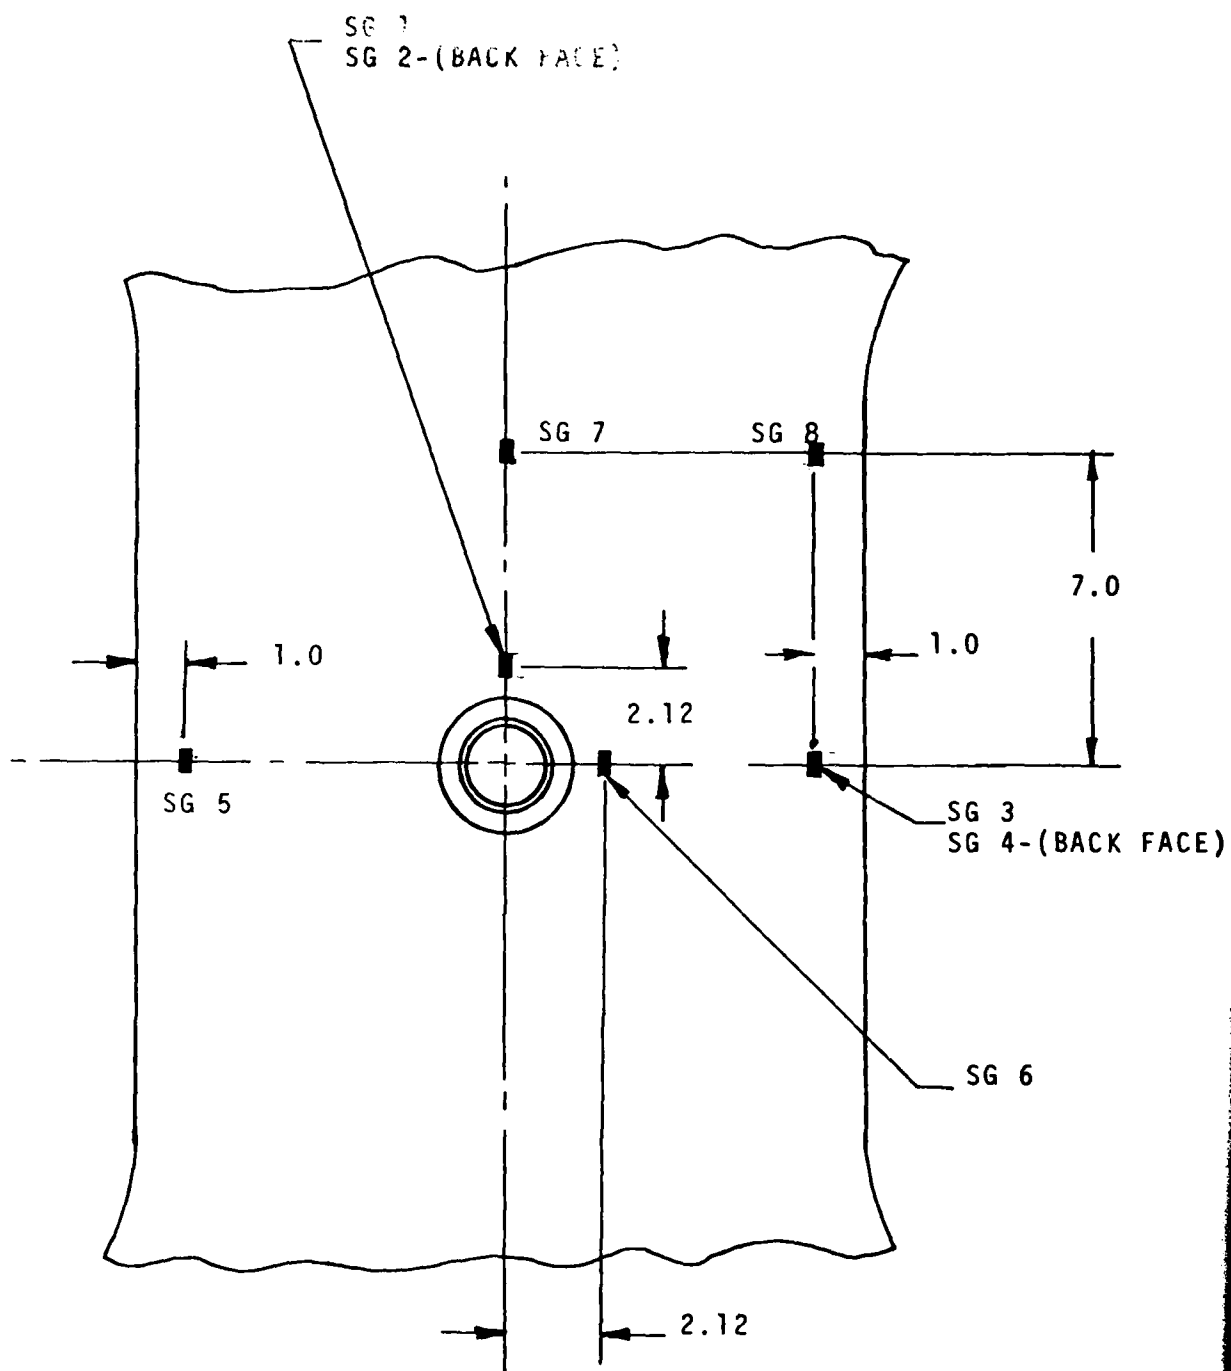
STRAIN GAGE LOCATIONS ON PANEL SPECIMEN
